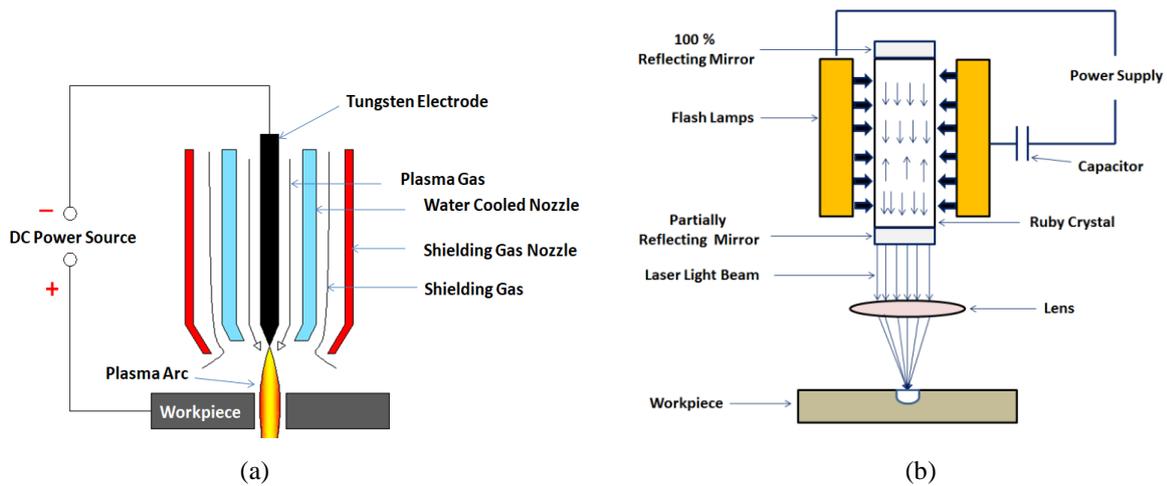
(a) Plasma Arc Machining (b) Laser beam machining
